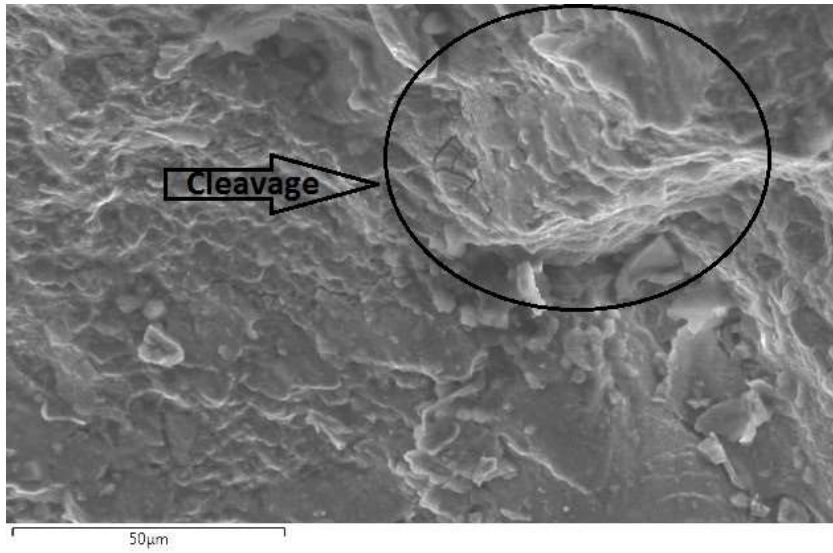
Cleavage fracture in the CrMoV clad layer
